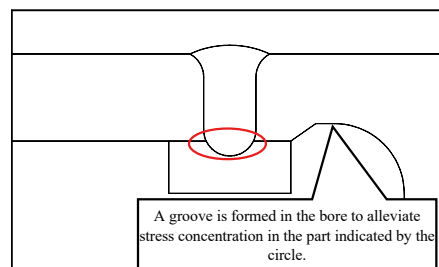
Geometry of bottom weld of newly developed KCH-8
